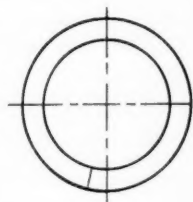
End view of helical compression spring shown in Fig. 1.
